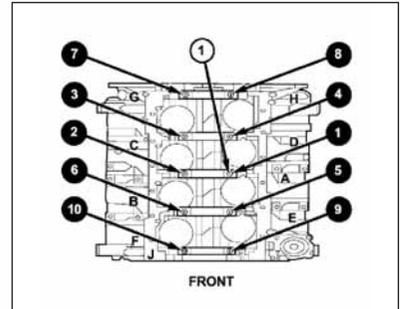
Crankshaft main bearing installation procedure for 2003-'06 Chrysler 5.7 and 6.1L engines.
